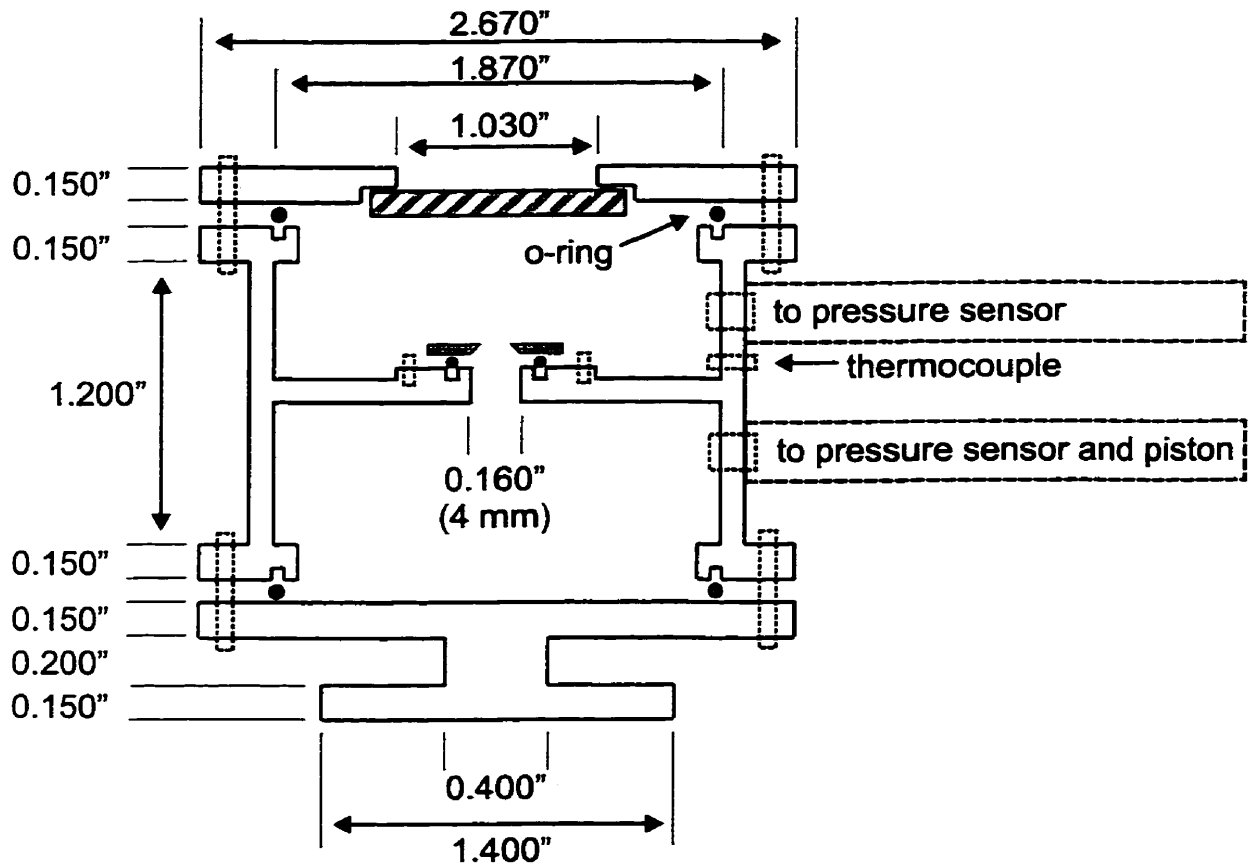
Technical drawing of pressure cell with dimensions indicated.
